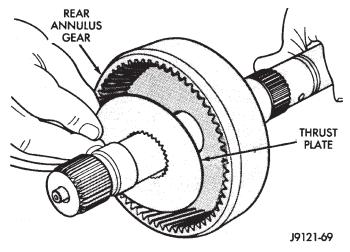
Installing Rear Annulus Thrust Plate—46RH
